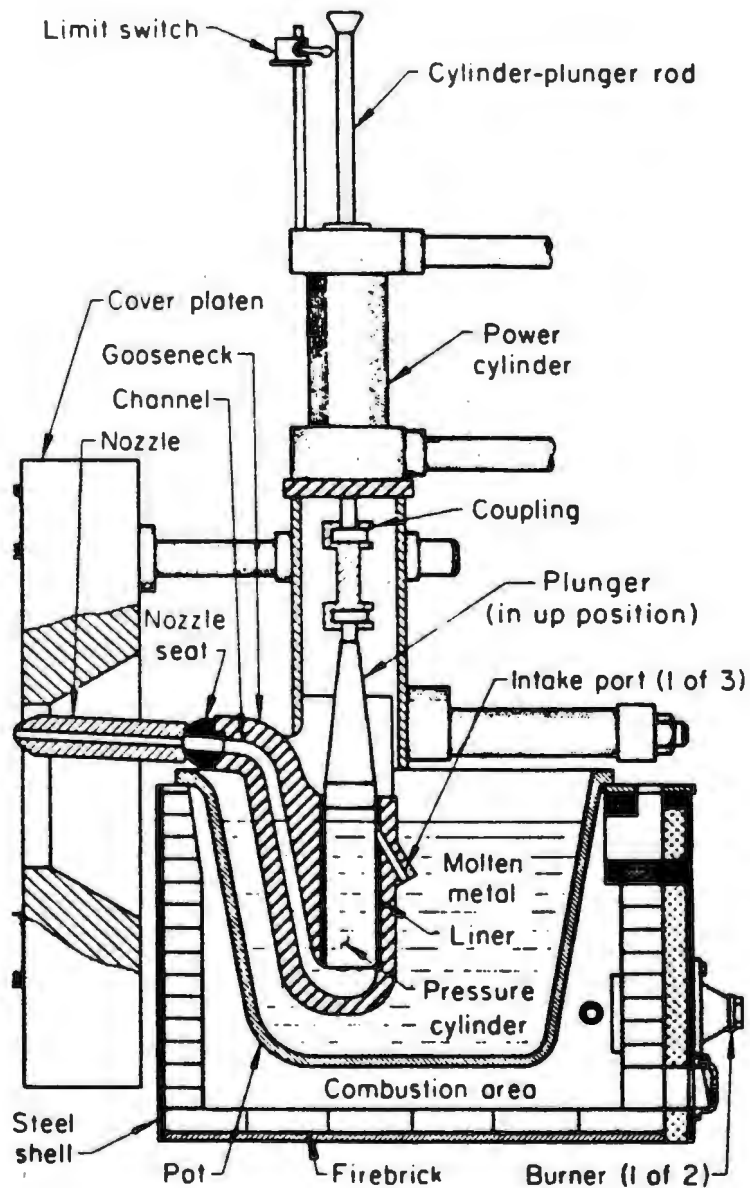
Typical Injection System of a Hot-Chamber Die Casting Machine (Reprinted from [12])
